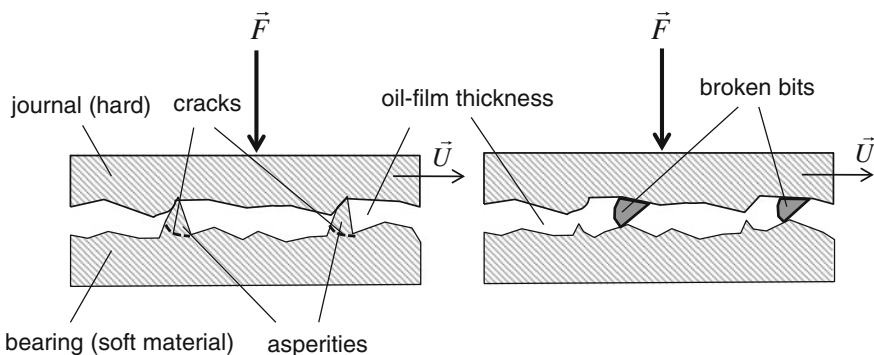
Adhesive and abrasive wear in the bearing clearance
